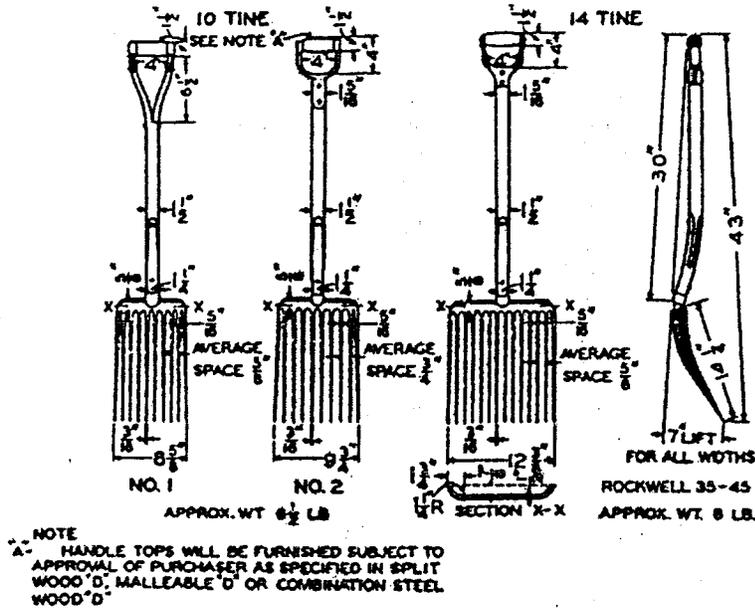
Plan 22-62 – AREMA Ballast Forks
